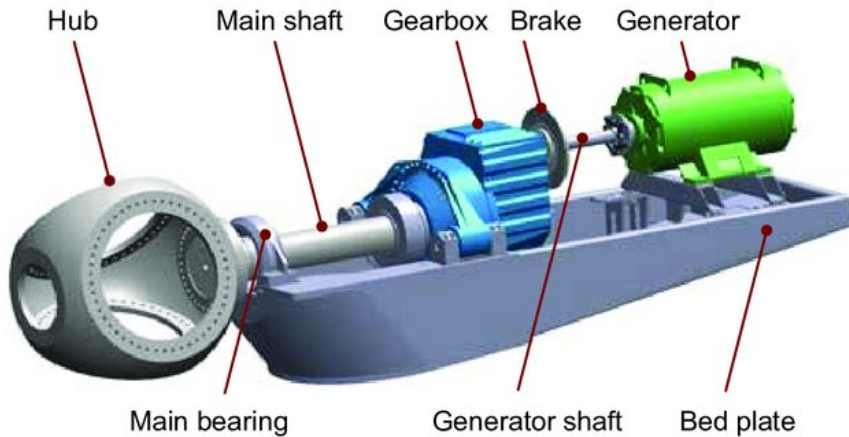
Typical Drive train assembly. Acknowledgement: [Sheng et al., 2011].
